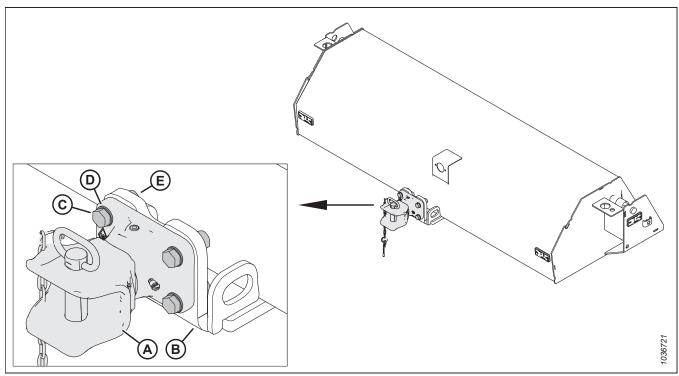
Clevis-Style Hitch Assembly (MD #346207) Installed
